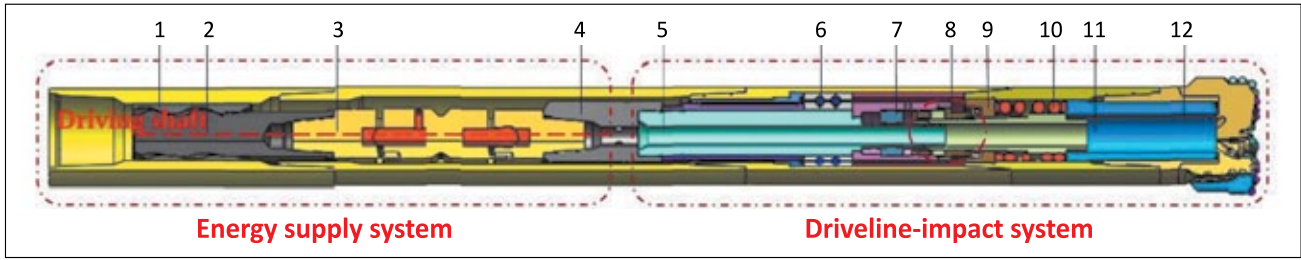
Structure diagram of impact-scraping drilling tool. 1. Rubber bushing; 2. Rotor; 3. Universal joint; 4. Water cap; 5. Driving shaft; 6. Bearing; 7. Piston; 8. Cam-roller system; 9. Spring base; 10. Spring; 11. Jarring axis; 12. Impact bit
